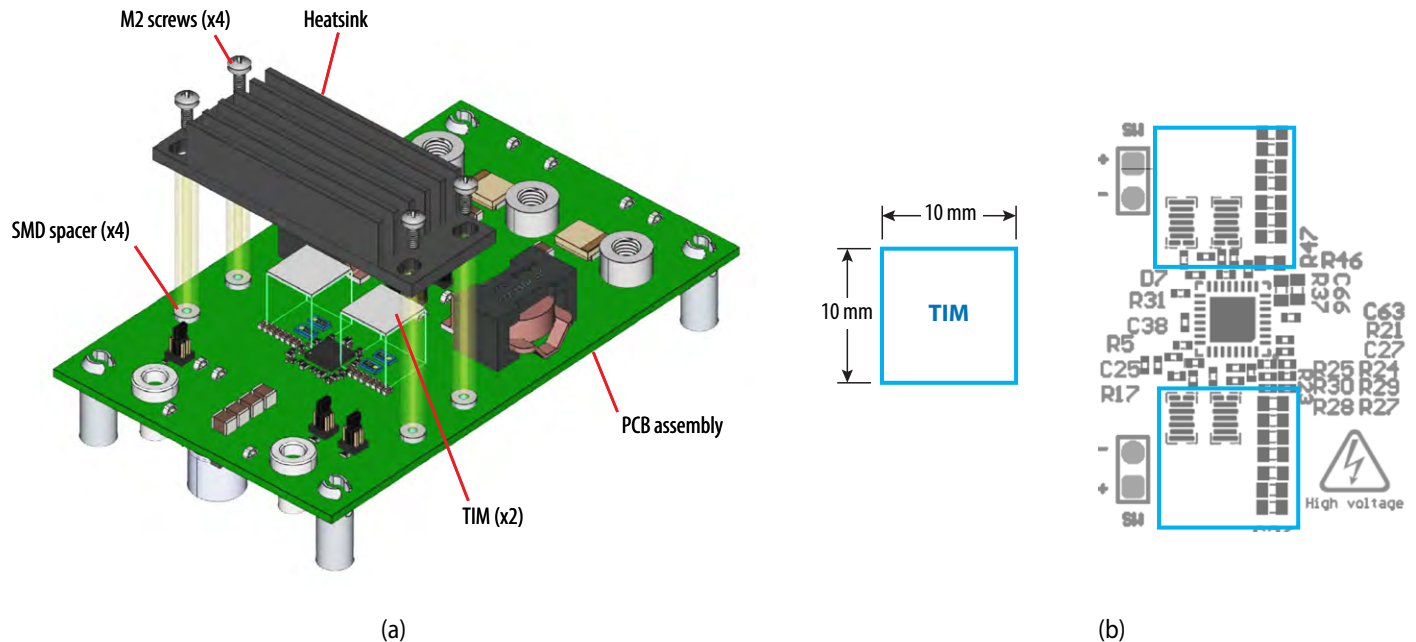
Exploded 3D assembly of heat sink installment (a) and dimensions and locations of TIM material (b)
